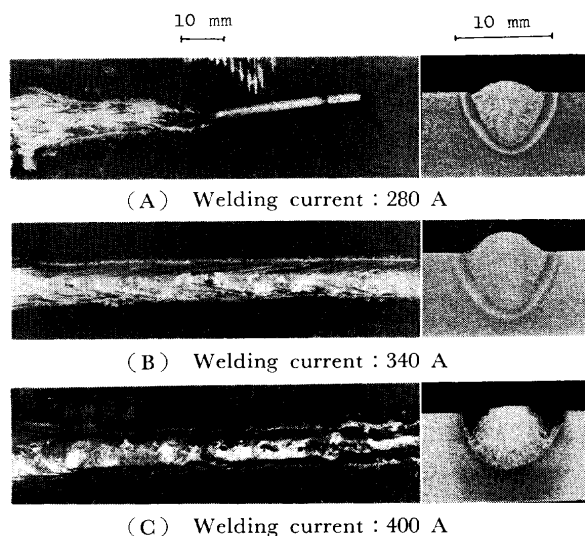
Effect of welding current on appearance and macro-structures of welds
